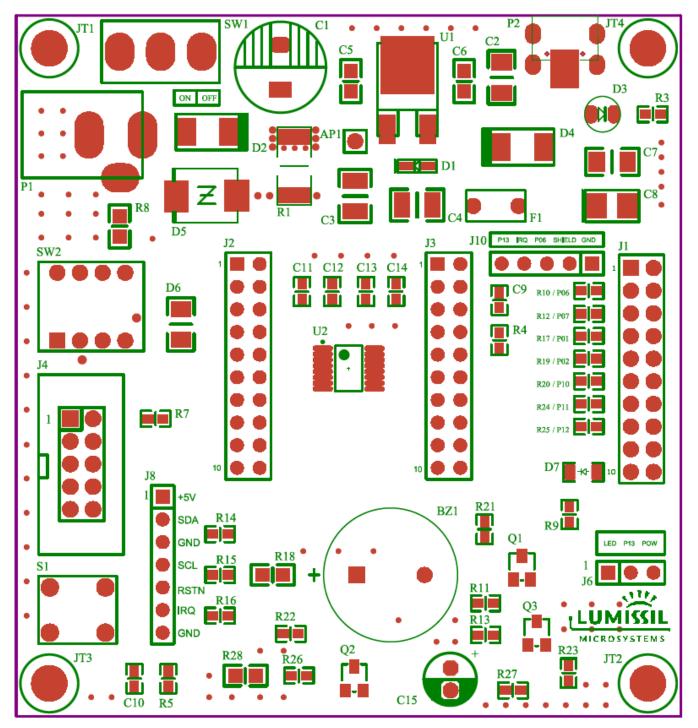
IS31CS8975 Evaluation Board Component Placement Guide - Top Layer
